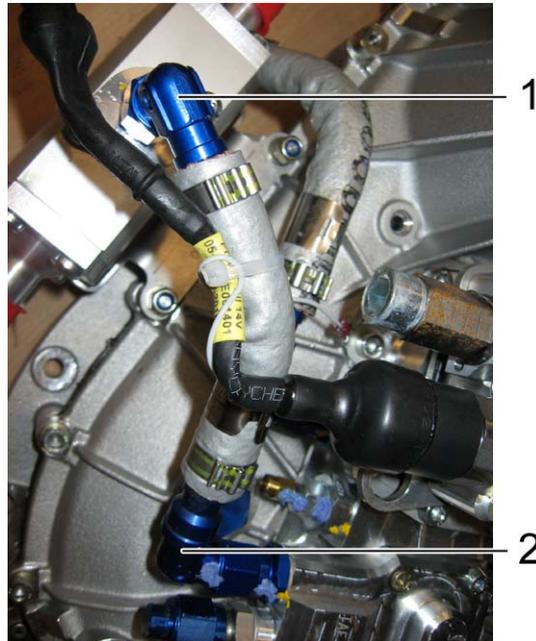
/ Fig.2 New hose pump – gearbox oil cooler
